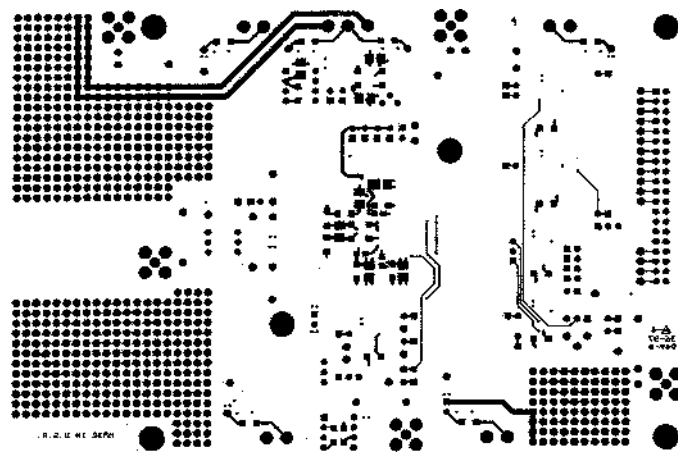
Evaluation Board Solder Side Layout (Not to Scale)
